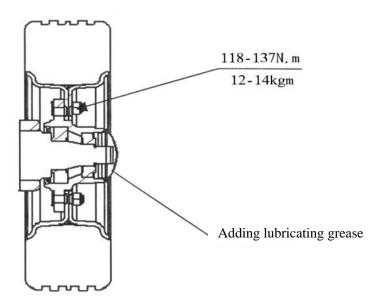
Fill lubricating grease and pre-load adjustment
